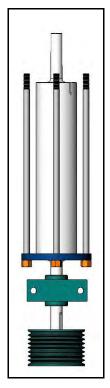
Blade Shaft Cleaned & Ready to Stack with Blades & Spacers
